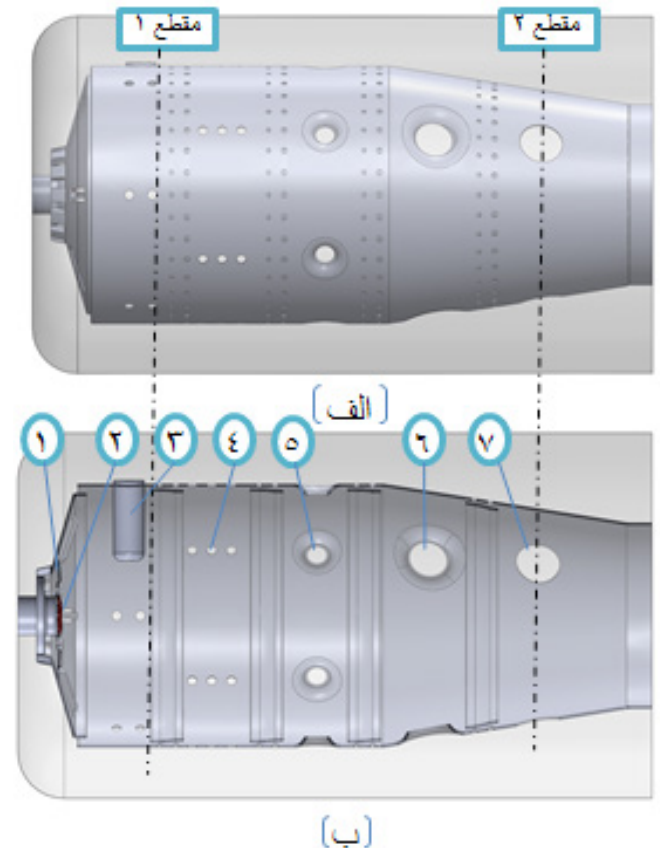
a. Combustion chamber geometry , b. cutting view of Combustion chamber geometry
